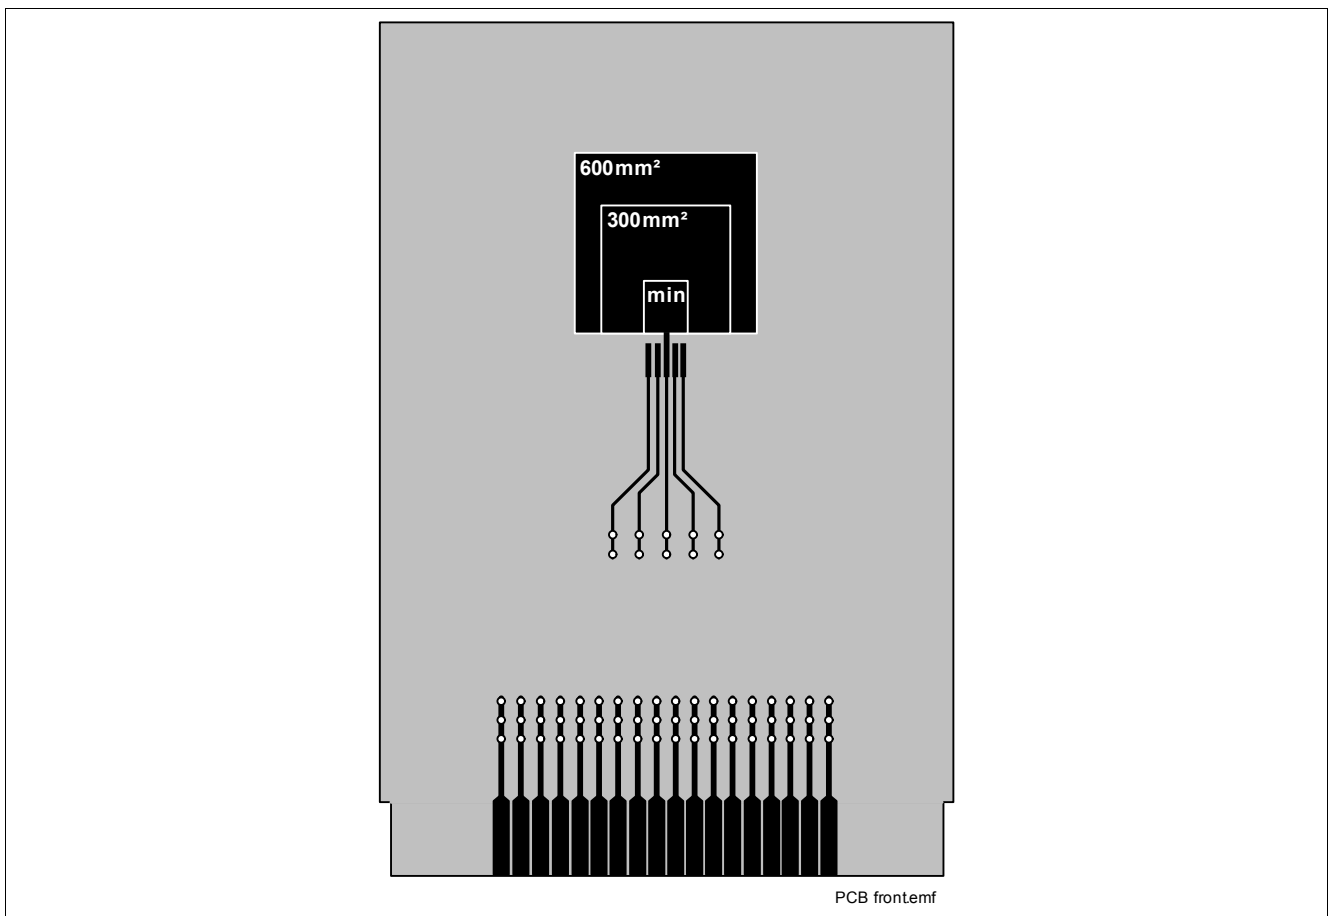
Front view of PCB layout used for Z_{thJA} simulation
